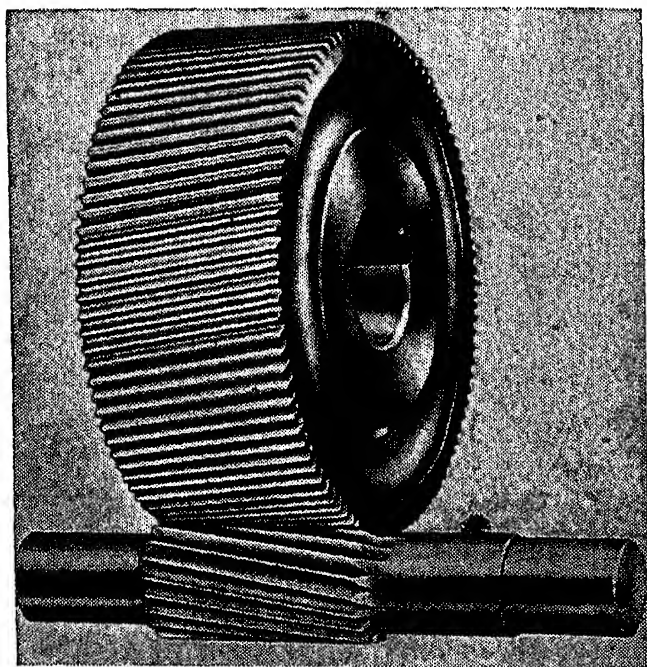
A helical gear and pinion. (Courtesy Foote Bros. Gear and Machine Co.)
